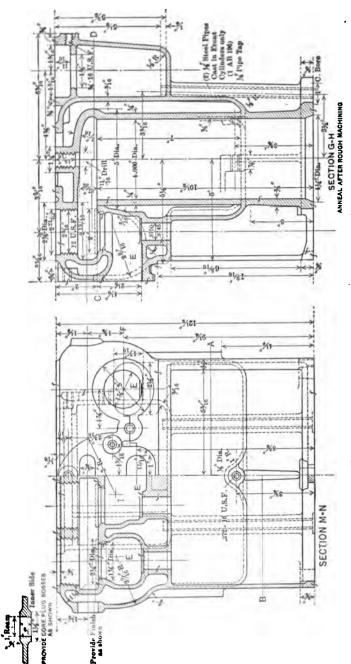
AND 38a.—Cylinders of Mack engine 4 X 5".
